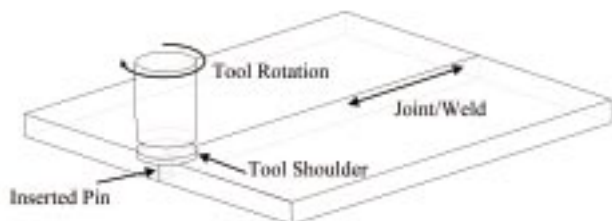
Schematic representation of the friction stir welding process and tool geometry
